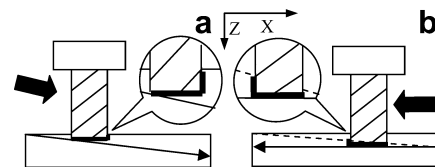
, b Two types (low to high) of ramp cuts and their contact area between tool and workpiece. a Forward (odd) cut. b Backward (even) cut
